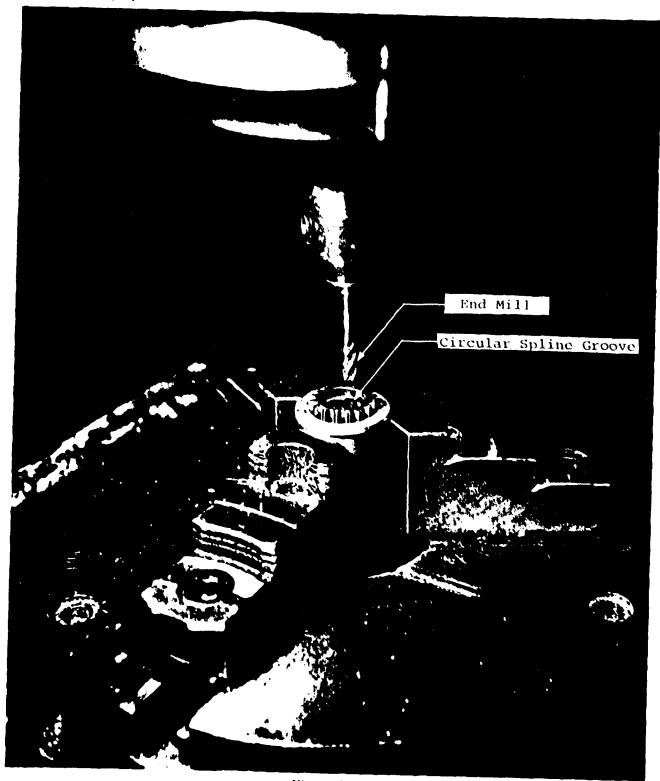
Milling Operation: Boring Internal Circular Spline Grooves in Plastic Adapter/Bushing
